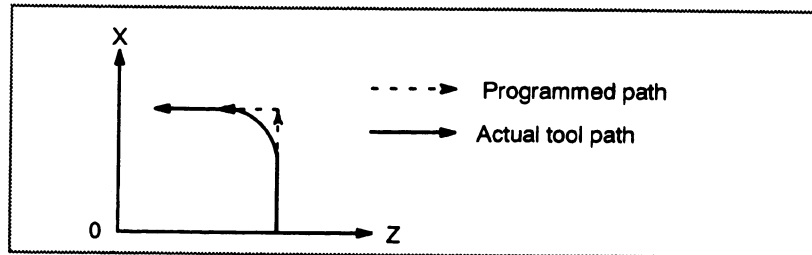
(b) Example of Tool Path between Two Blocks
